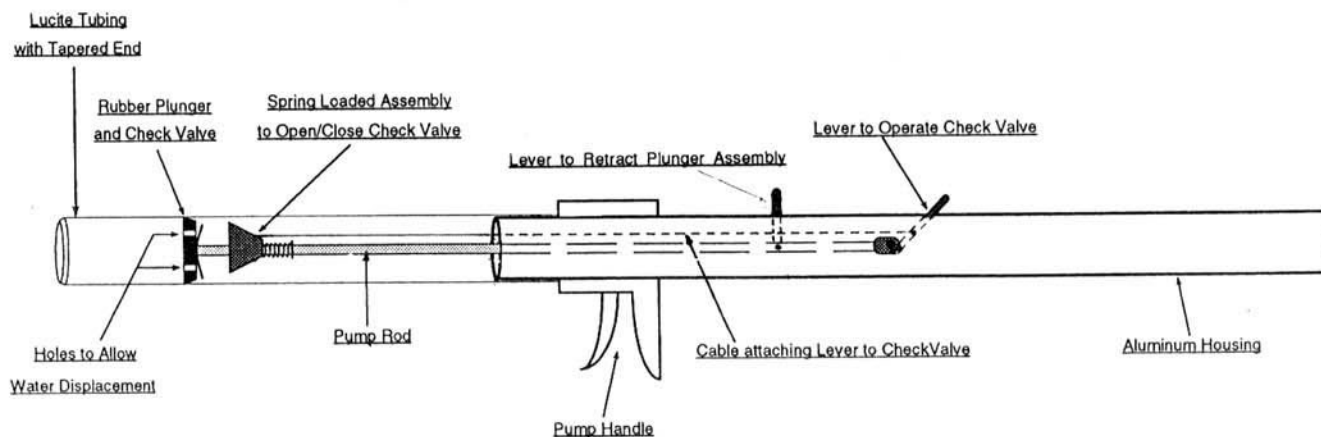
Cross-section of the bed sediment sampler showing the plunger mechanism and spring-loaded check valve assembly for obtaining precise volume samples.
